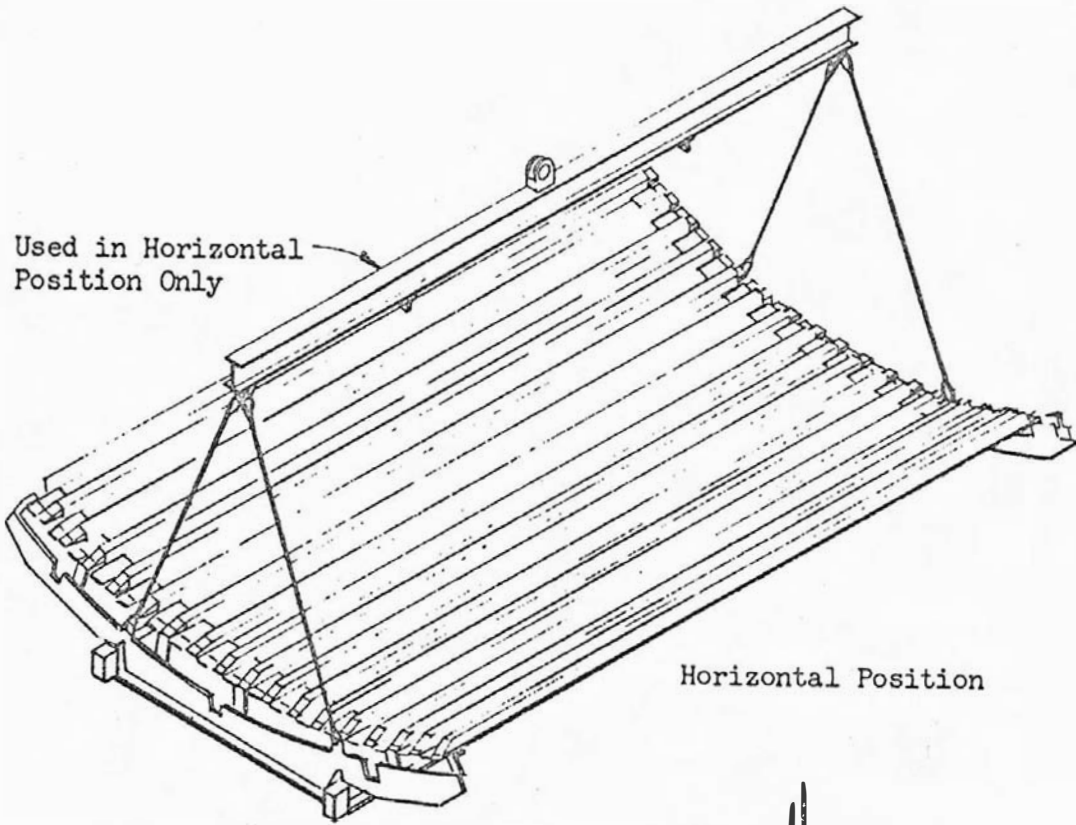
Skin Panel Subassembly Handling Tool HT-570-28050
